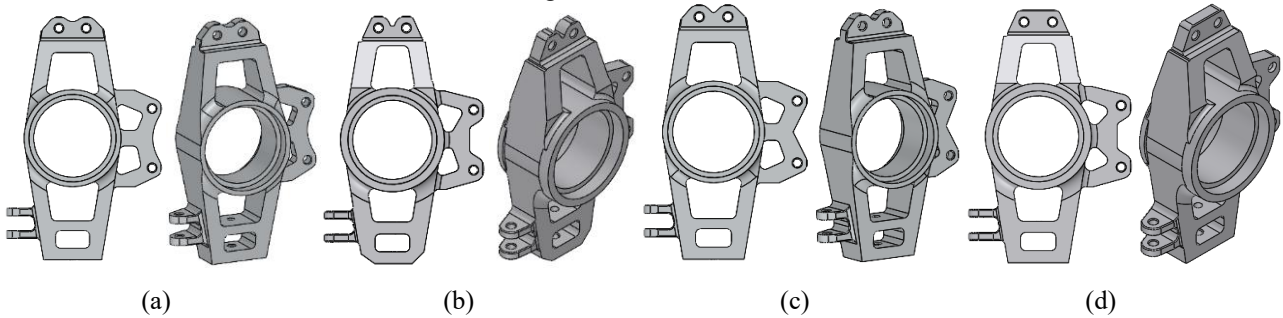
Optimized front steering knuckle geometry for machining: (a) 7075 T6 Aluminum - ANSYS, (b) 7075 T6 Aluminum - SolidWorks, (c) Alumold Aluminum - ANSYS, and (d) Alumold Aluminum - SolidWorks
